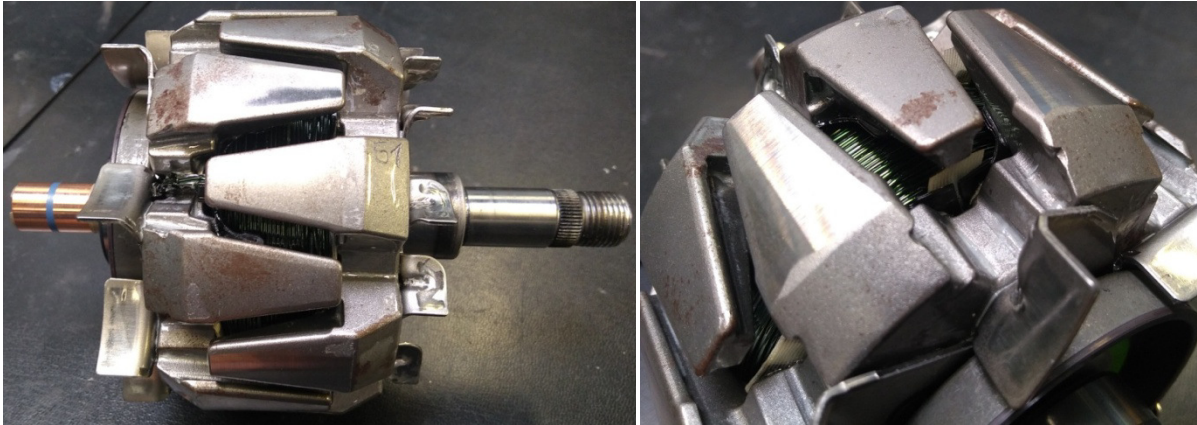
Prototype claw-pole rotor for recycled magnets but without the magnets
